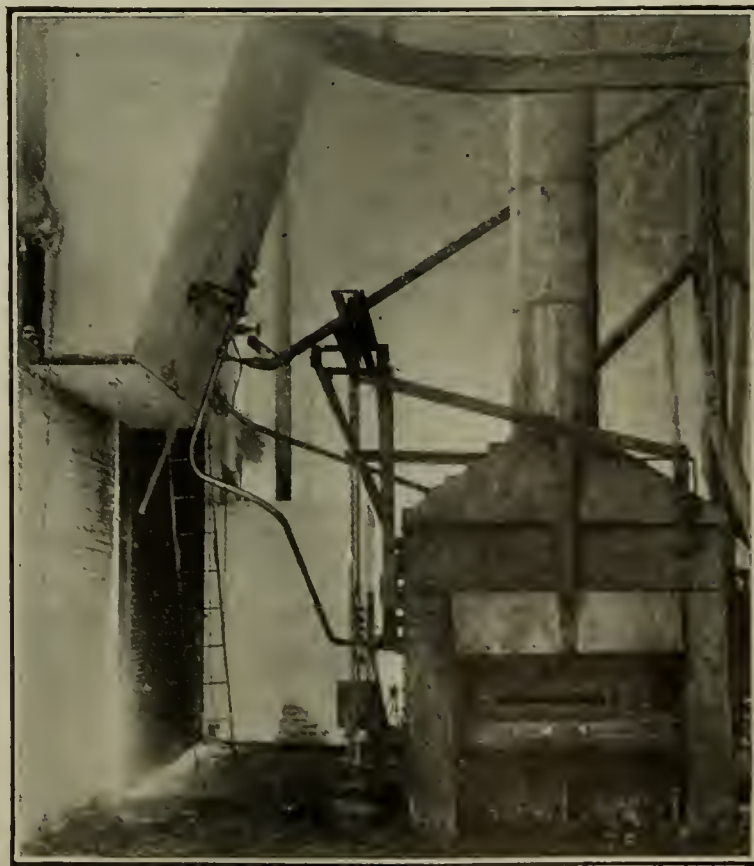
VIEW OF A SMALL FORGING FURNACE WITH PULVERIZED COAL BURNER
